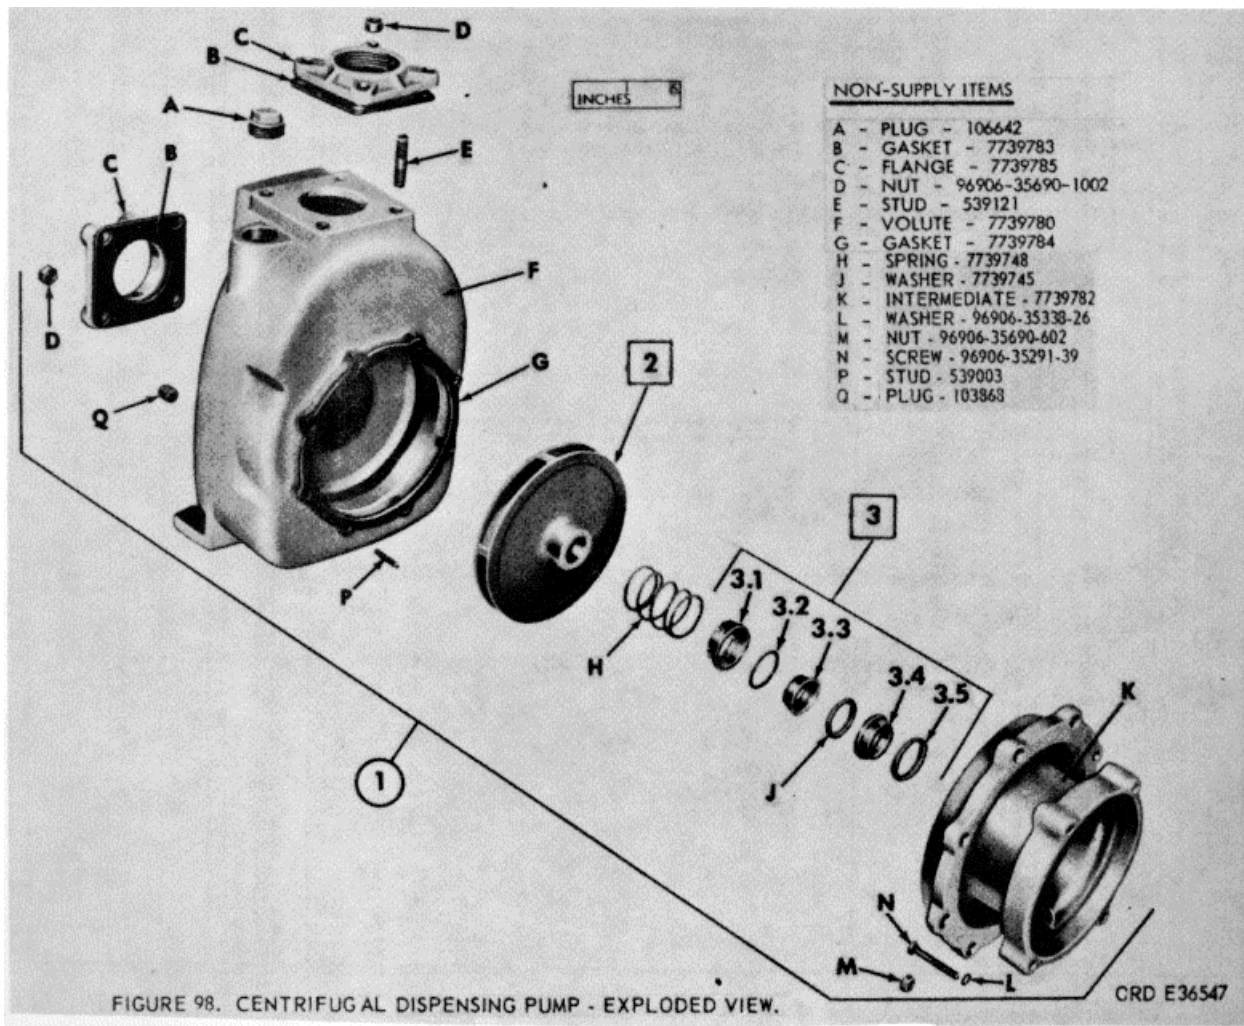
CENTRIFUGAL DISPENSING PUMP - EXPLODED- VIEW
